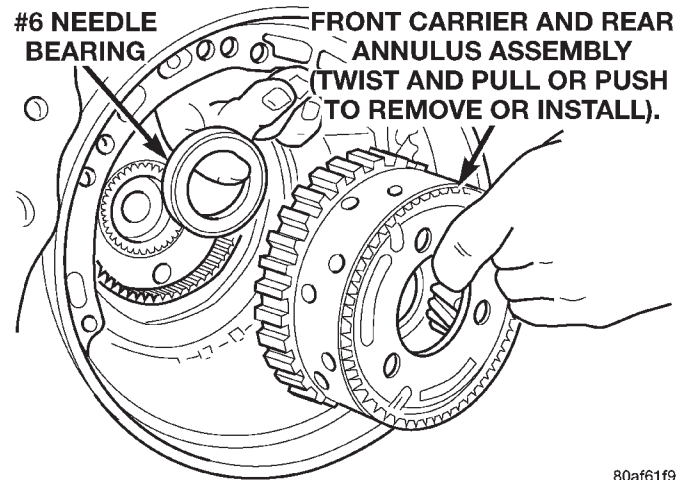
Install Front Carrier and Rear Annulus Assembly
